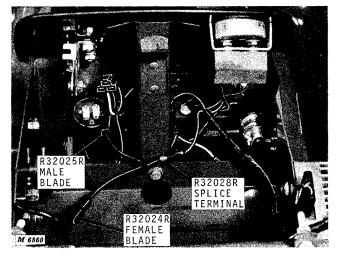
Attaching Wires to Ignition Switch, without AM31826 Wiring Lead
